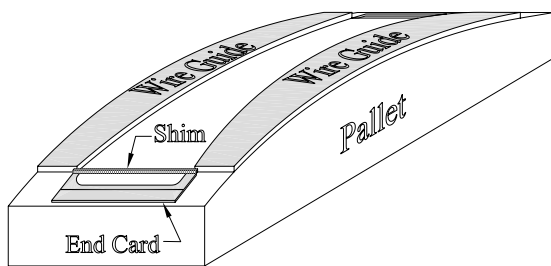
A sketch of the fixture used to assemble the field sheets. The arcs of the pallet and wire guides are exaggerated.
